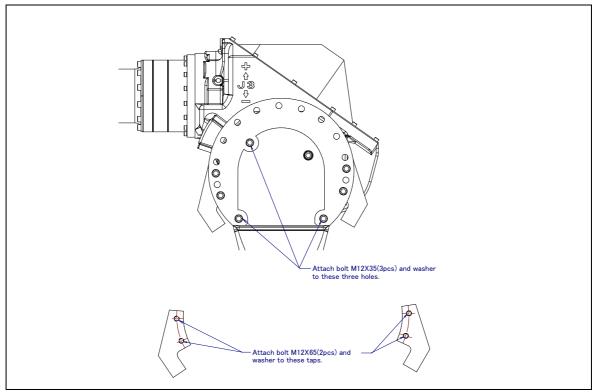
(d) J3-Axis movable mechanical stopper
